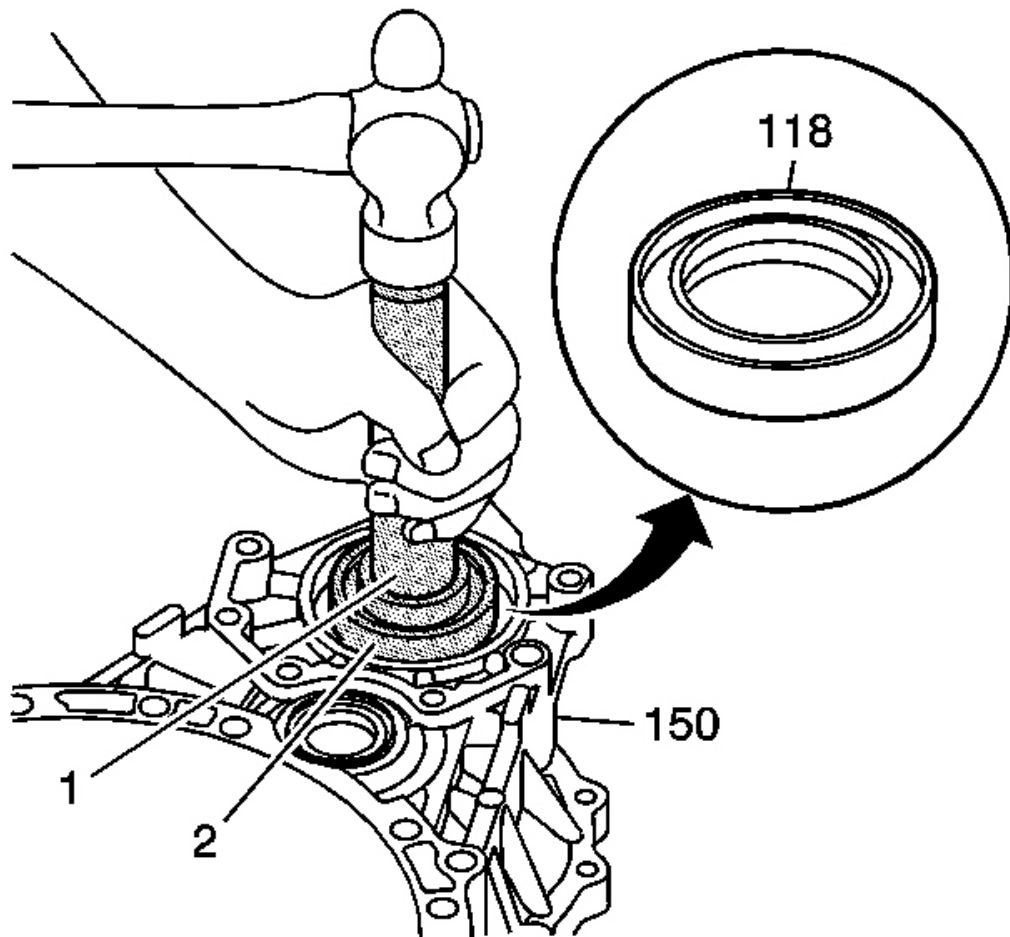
Installing The Transfer Case Input Shaft Seal Using DT 46428 & EN 46342
